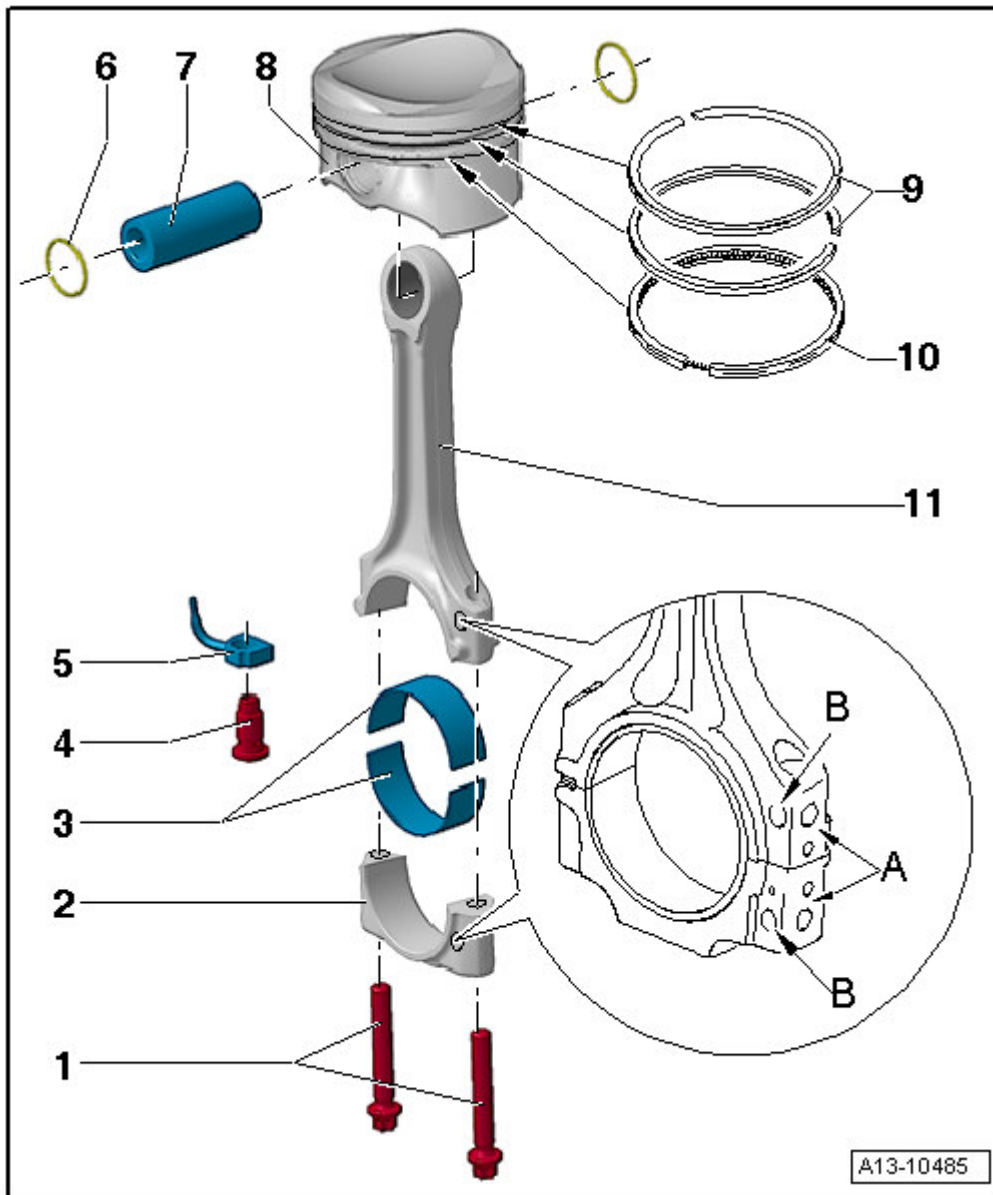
Identifying Assembly Overview: Pistons And Connecting Rod
